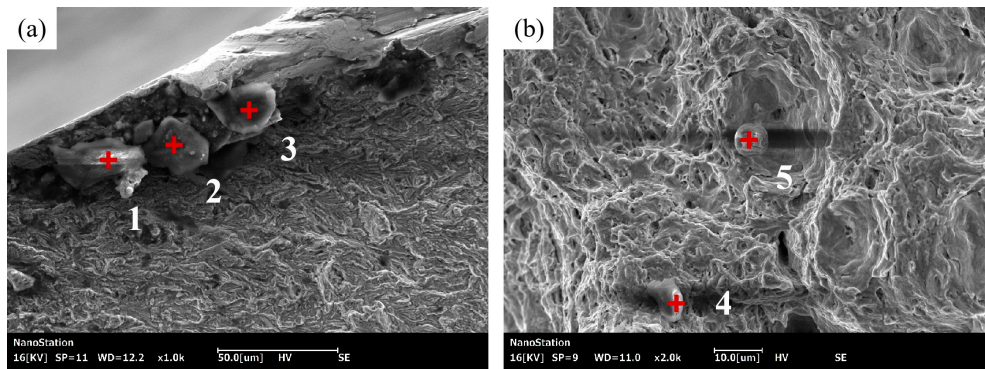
Inclusions in different zones of fatigue fracture under the maximum stress of 590 MPa (a) I zone; (b) II zone.
